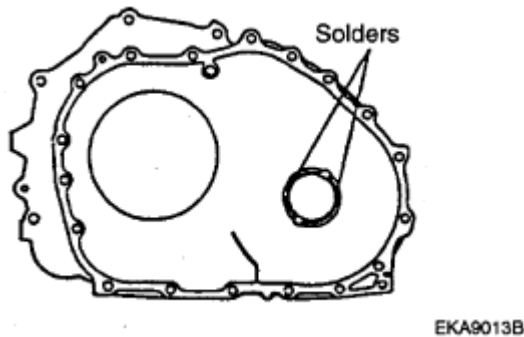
Identifying Oil Seal On Torque Converter Housing By Using SST (09453-1M400)
